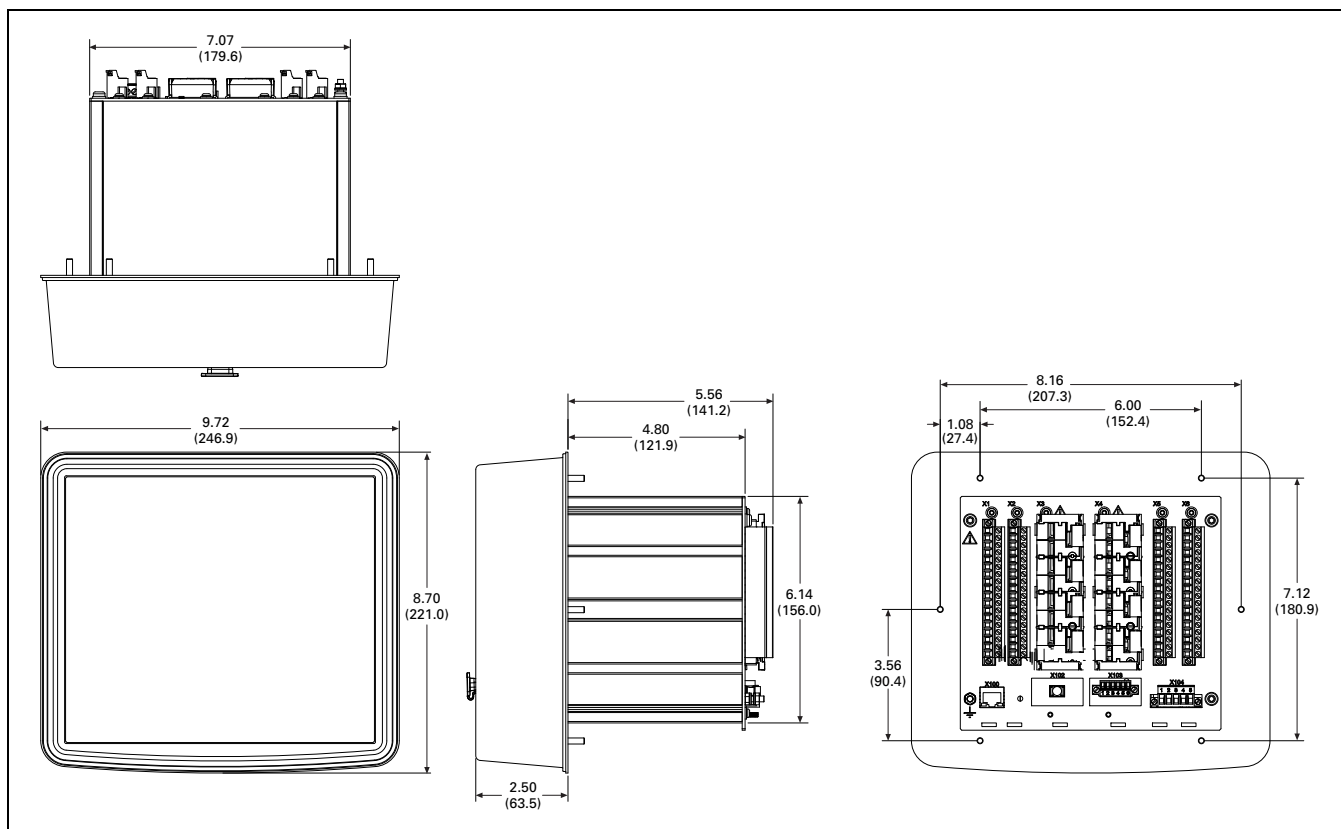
Projection Mount Front and Side Views—Dimensions in Inches (mm)
